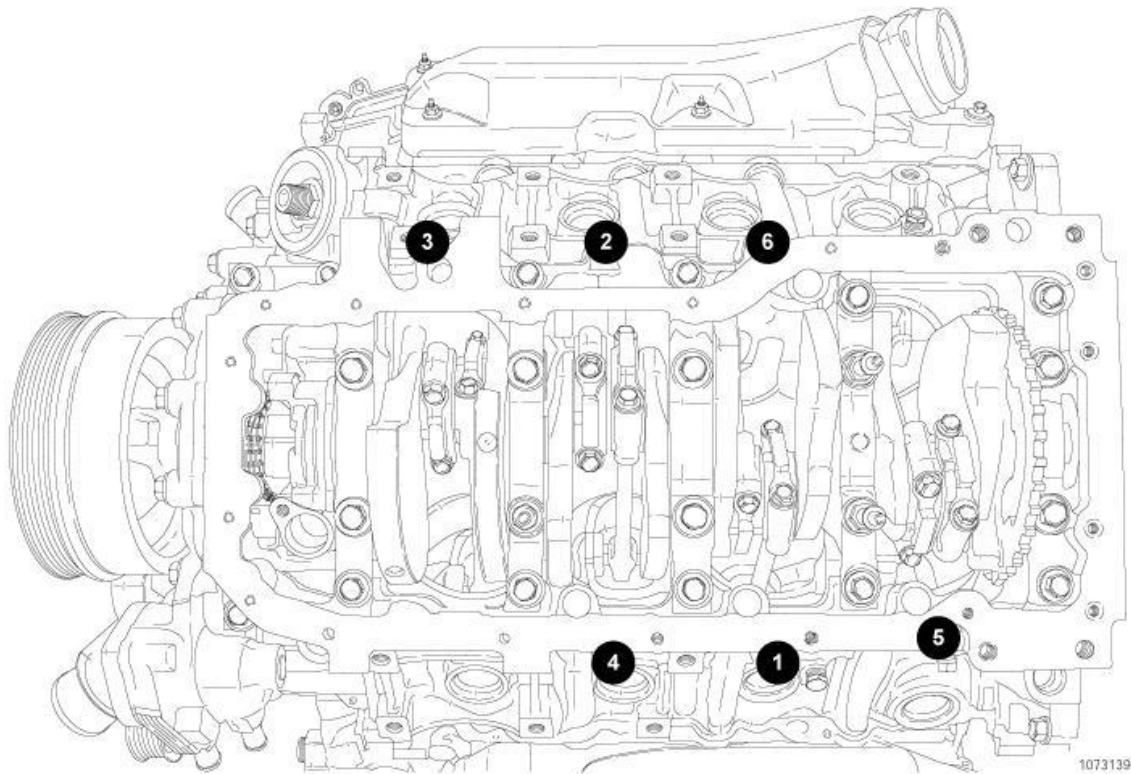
Tightening Bedplate Bolts (4 Of 4)
